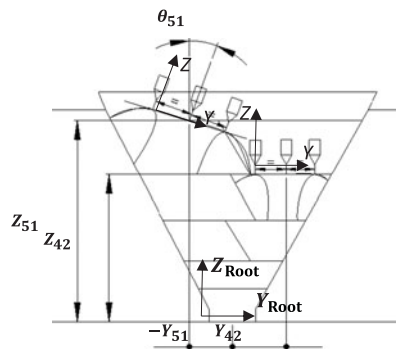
Weld electrode movement in multi-layer welds.
